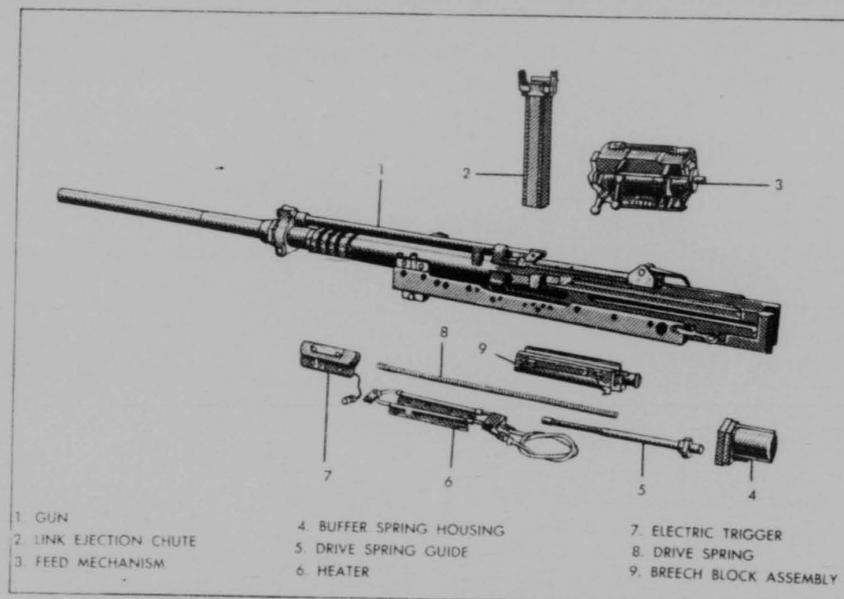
20-mm Machine Gun Partially Disassembled.
